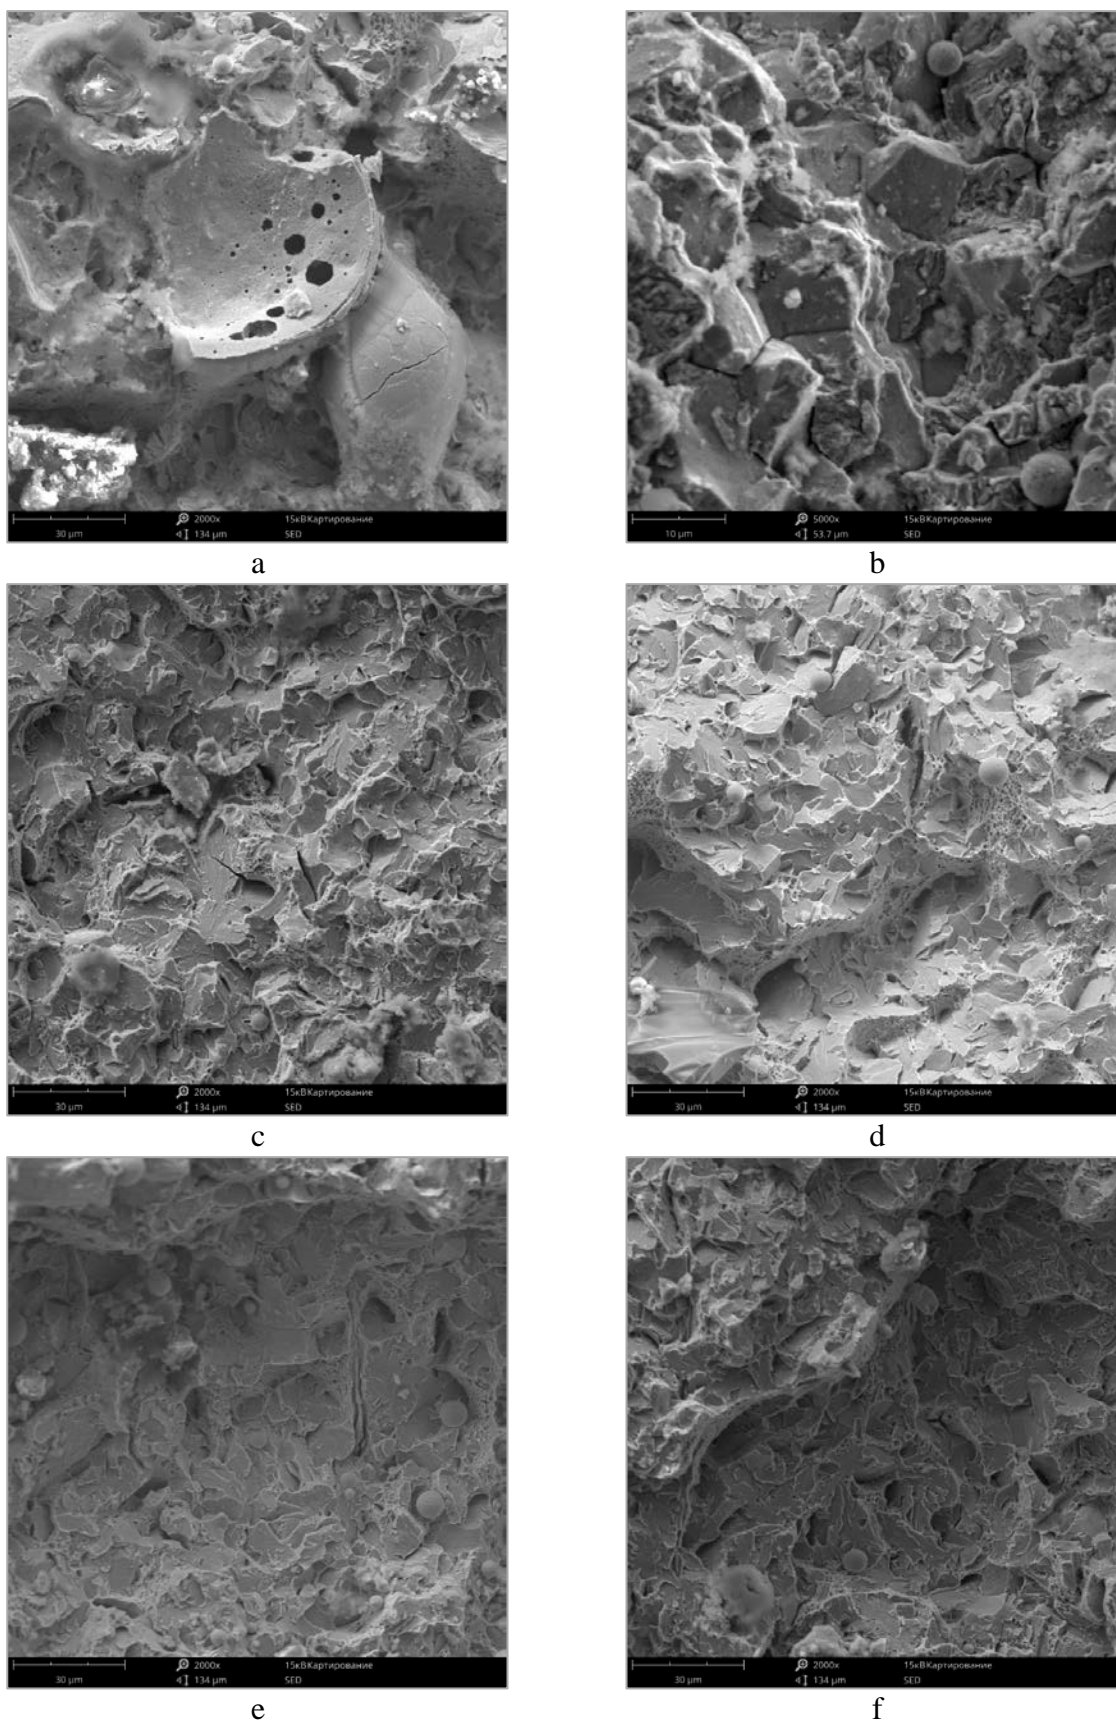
Electron fractography of the spring's failure surface:
